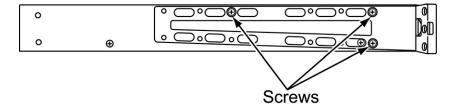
Rack Mount Bracket Installed 19" CHS1U-US Chassis
